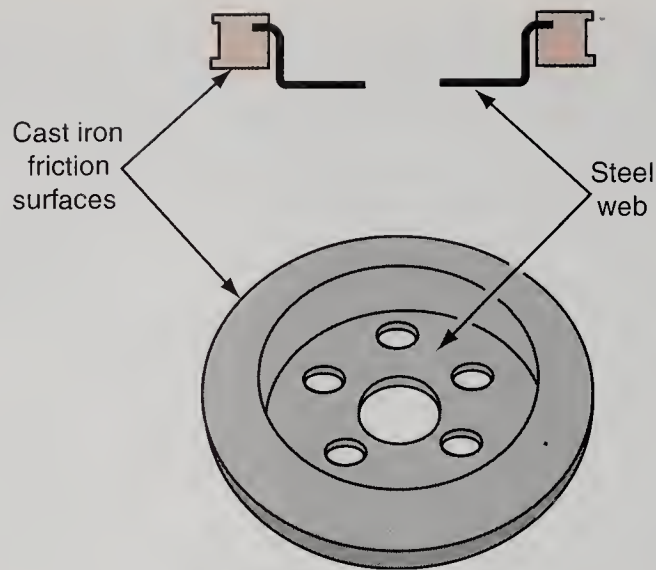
The cast-iron friction surfaces are cast onto the steel web during manufacture to form a composite rotor. The steel web of this rotor also contains the parking brake drum.
